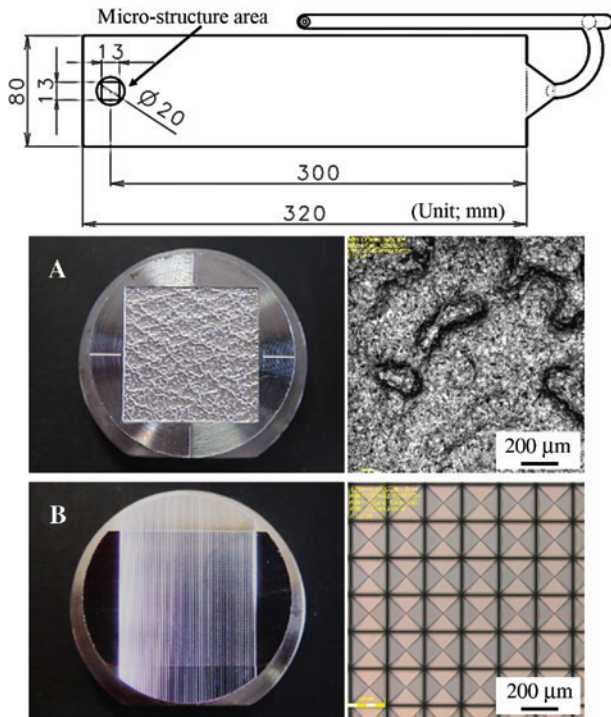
Shape of molded samples and pictures of mold insert with microstructure surface produced. (A) Edging process. (B) Ultra-precision cutting process.
